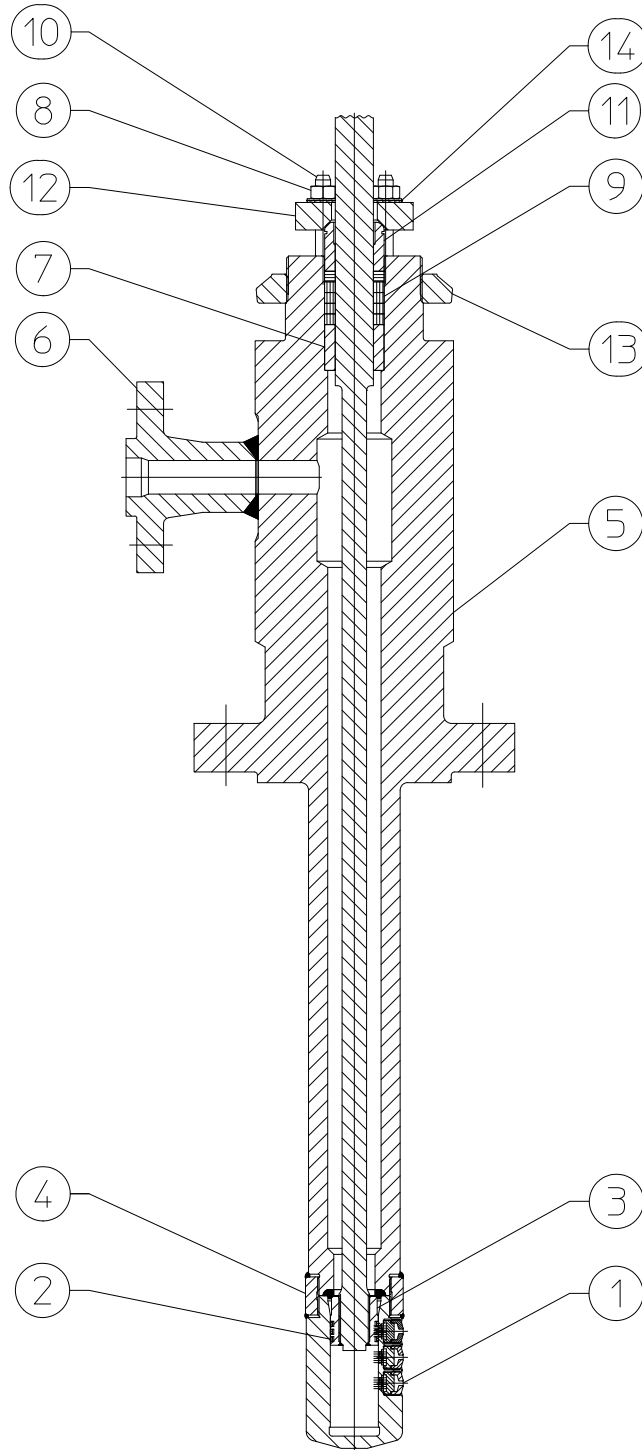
Fisher Yarway AT-38/48 Desuperheater Assembly
